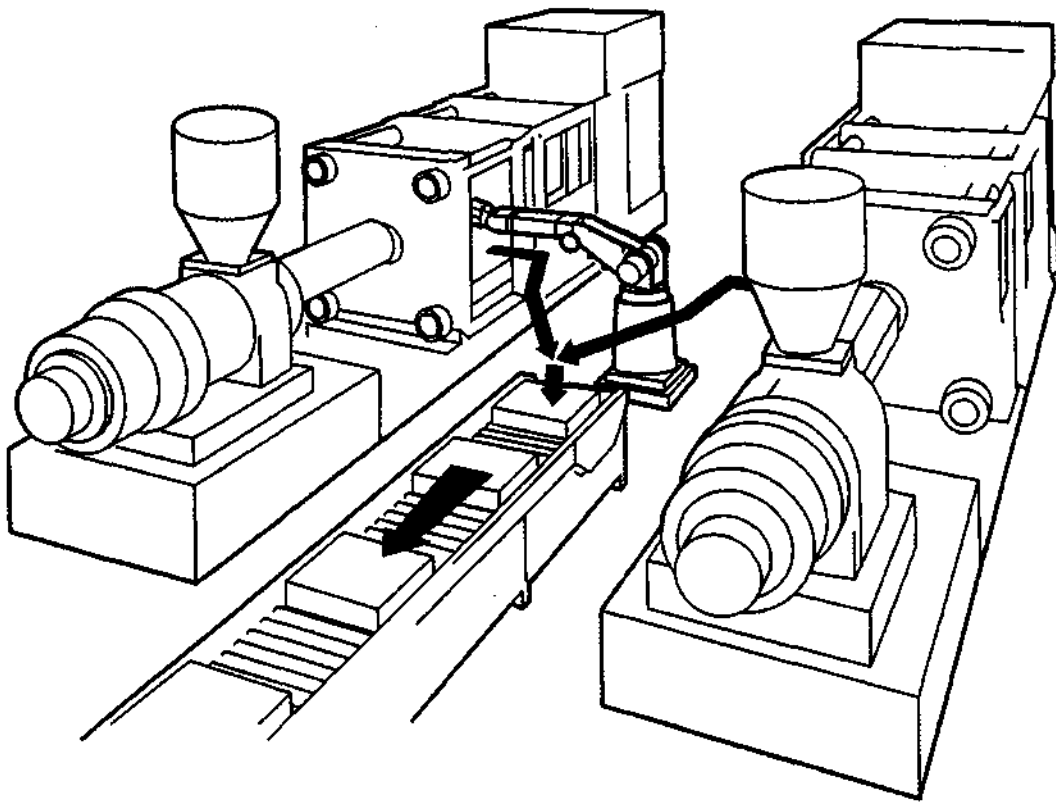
G5 A robot unloading molded parts from two injection molding machines. (Courtesy Millicron, Inc.)
